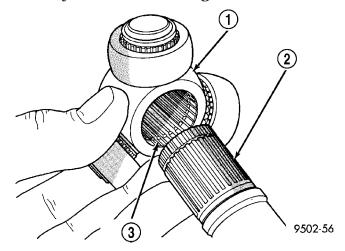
Spider Assembly Installation on Interconnecting Shaft
